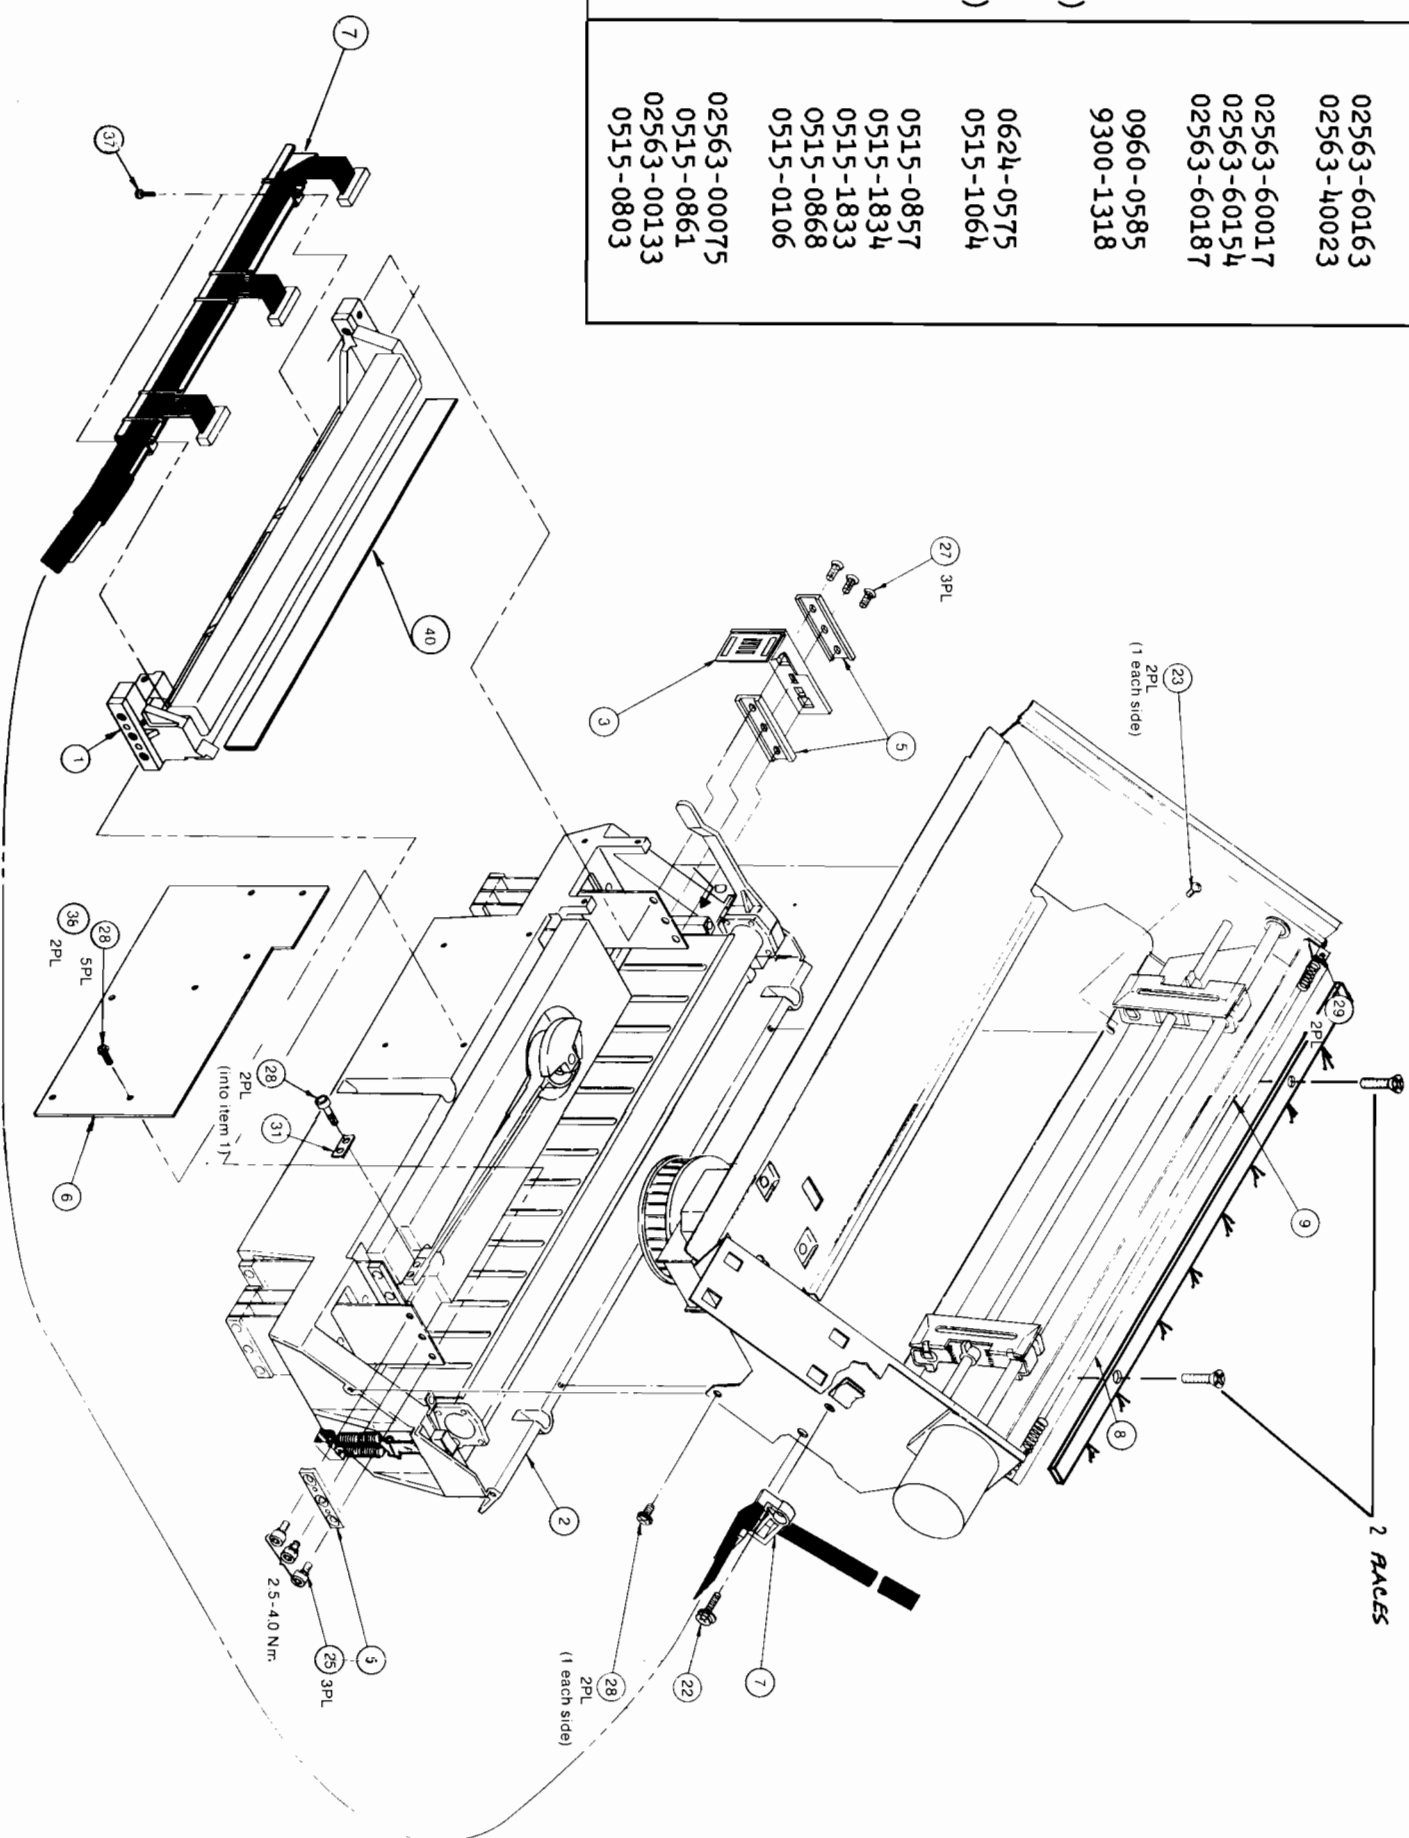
Print Mech and Paper Motion Assy, IPB
